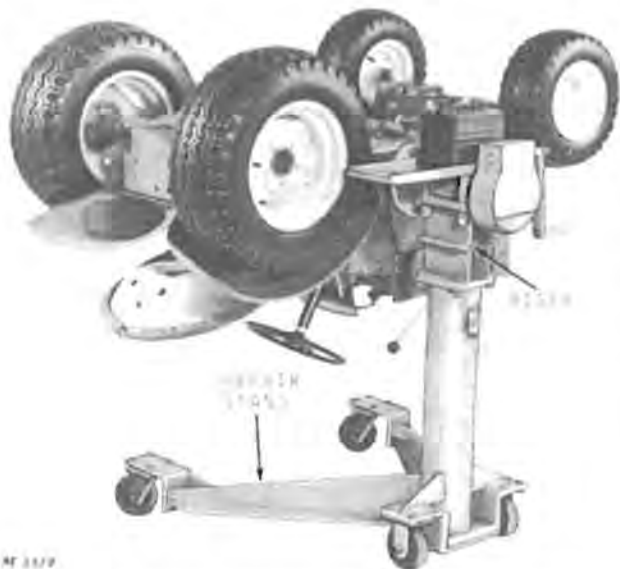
Tractor Inverted on Repair Stand for Easy Transaxle Removal
